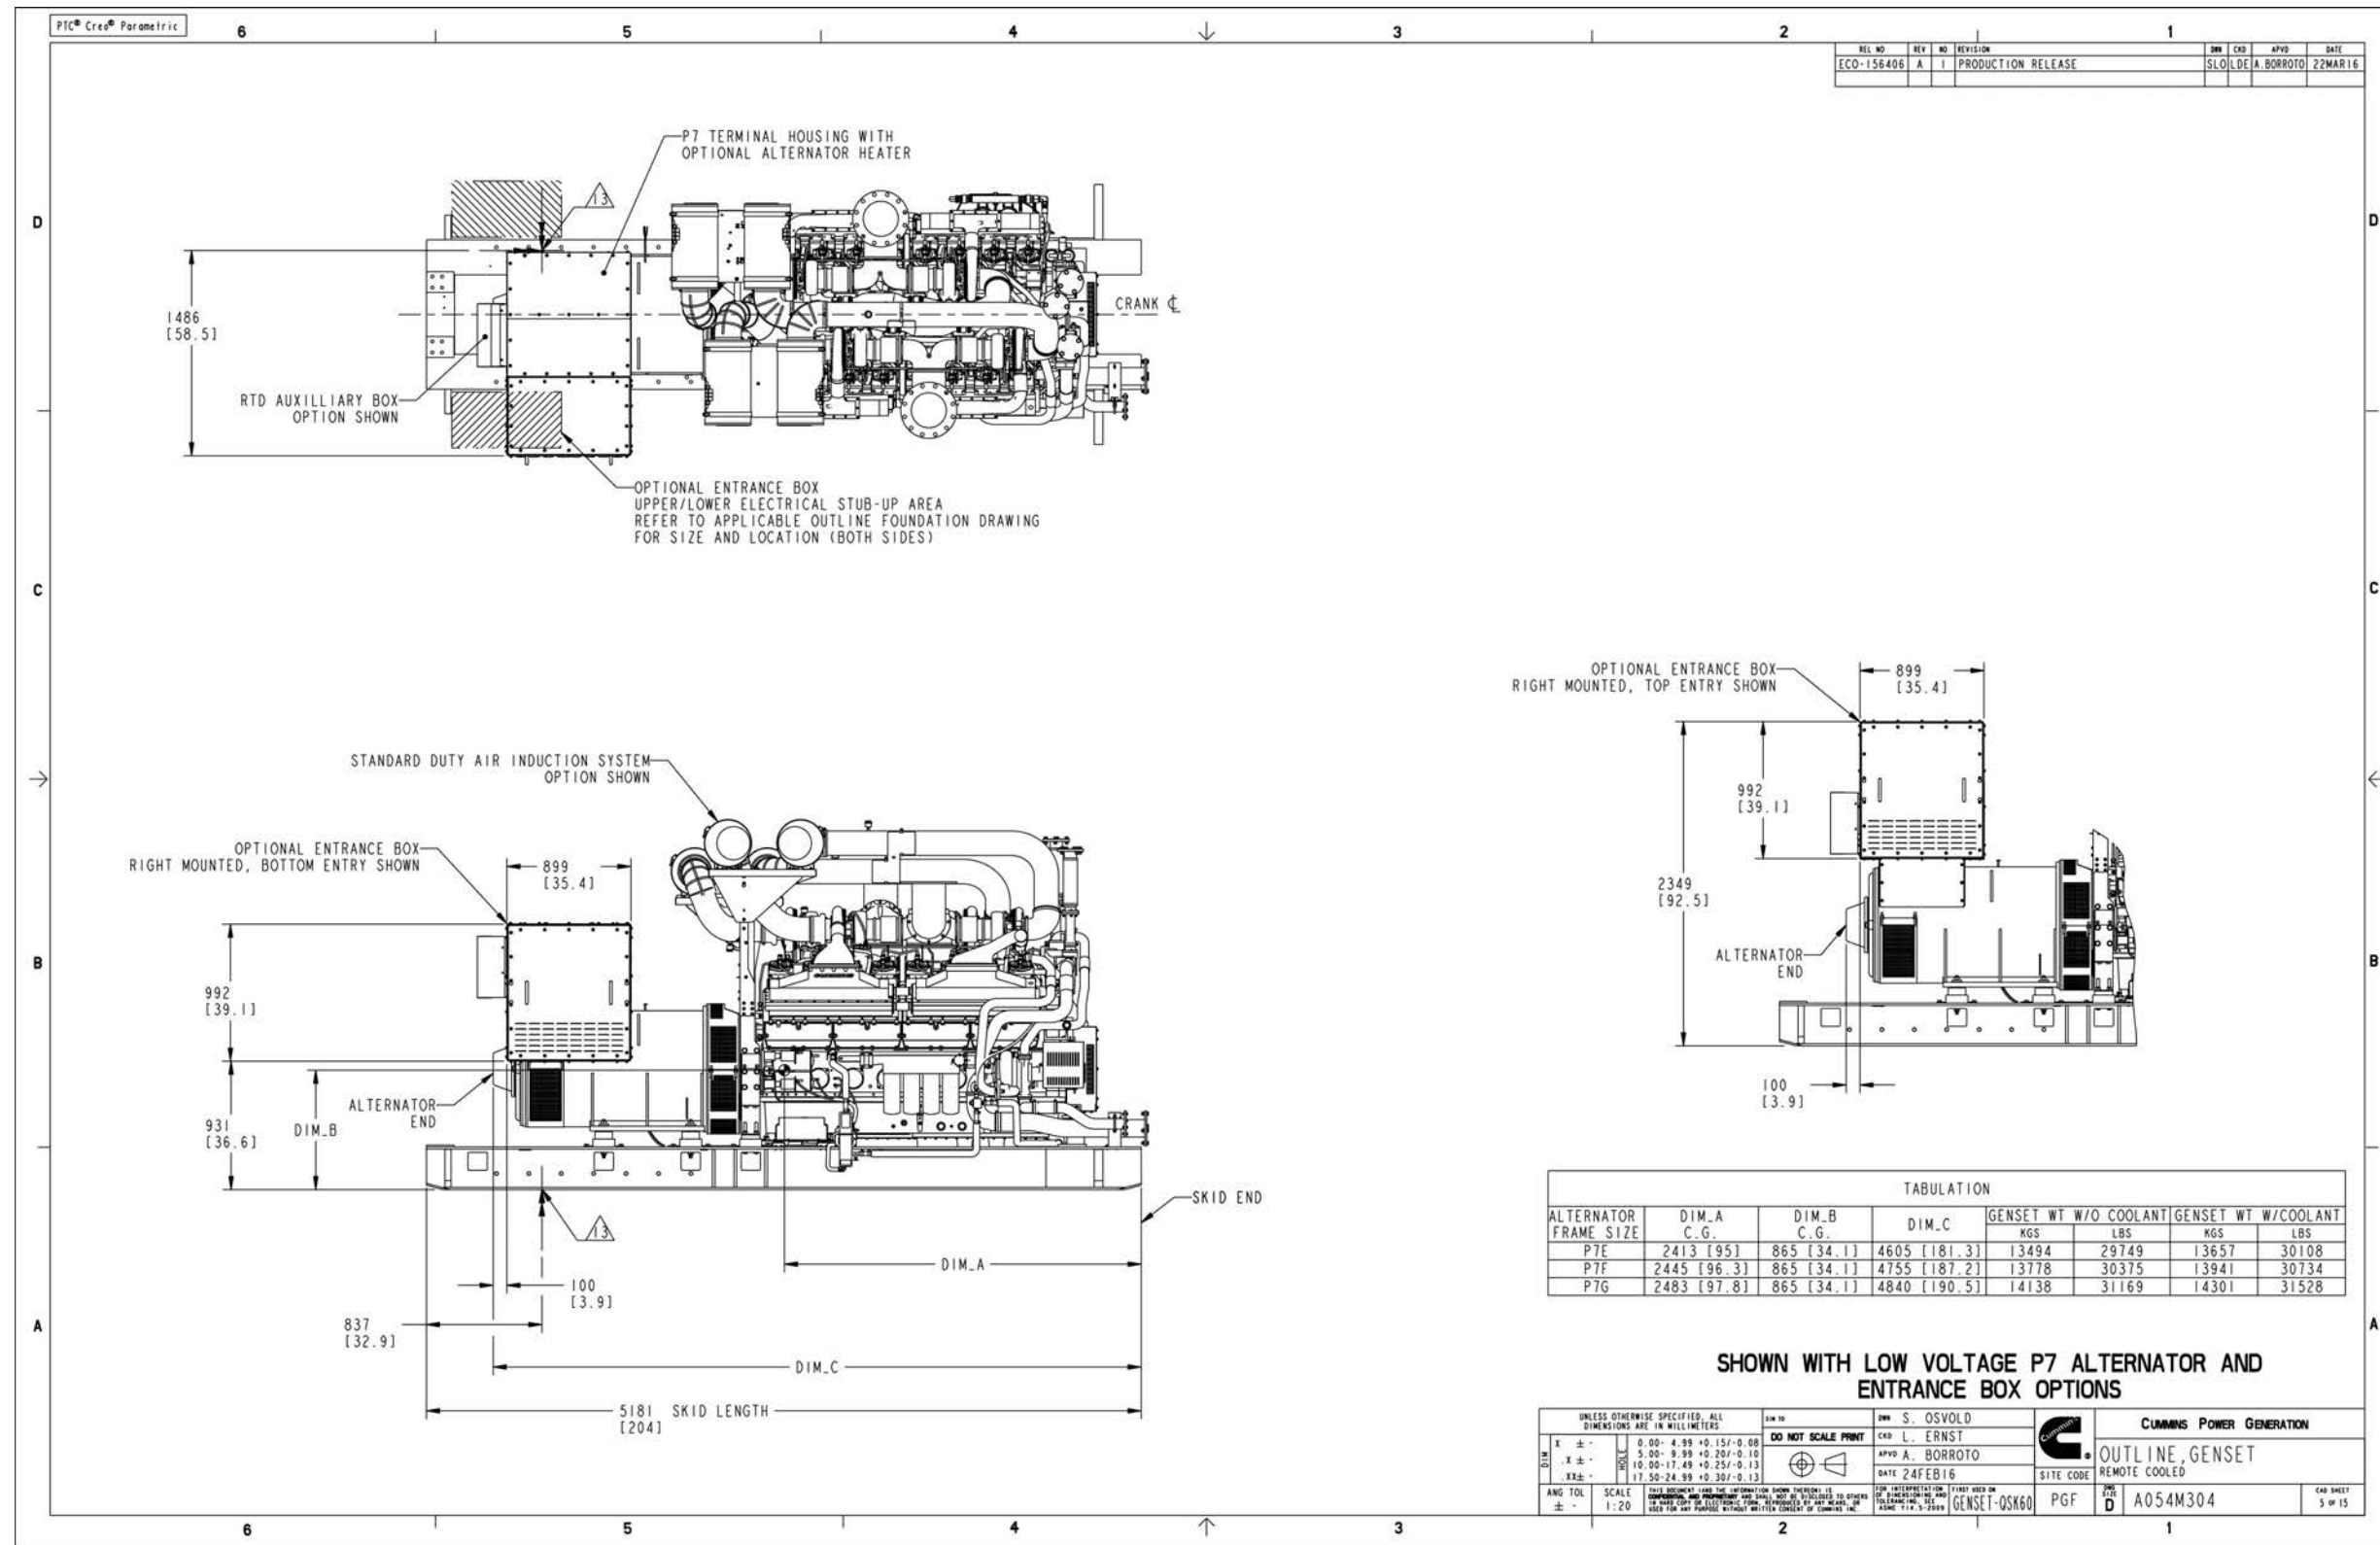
GENERATOR SET WITH REMOTE COOLING OUTLINE DRAWING (SHEET 5)
